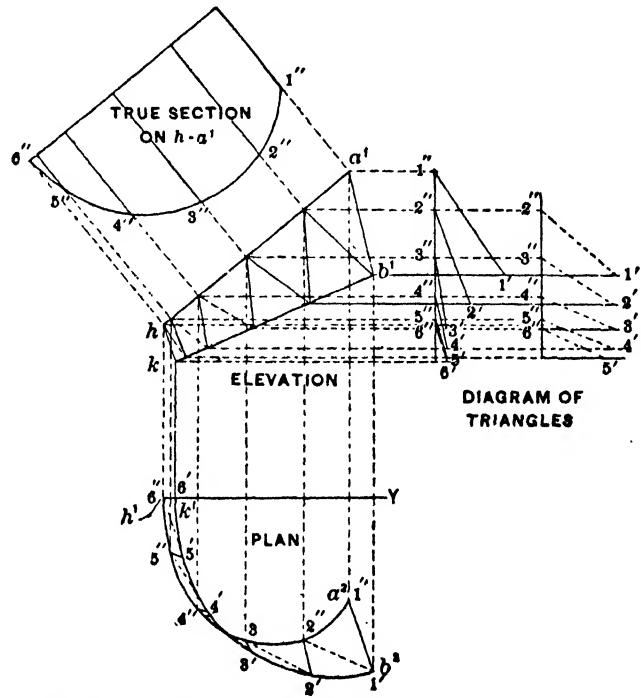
Elevation, Plan and Section of Second Piece $k h a' b'$, in Left Side of Fig. 89, Showing Triangulation
